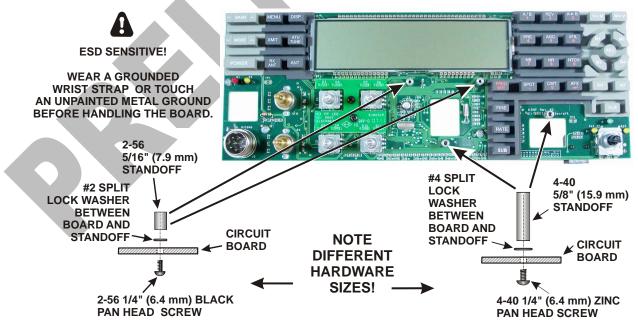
Preparing the Front Panel Board for Mounting, Part 2.
